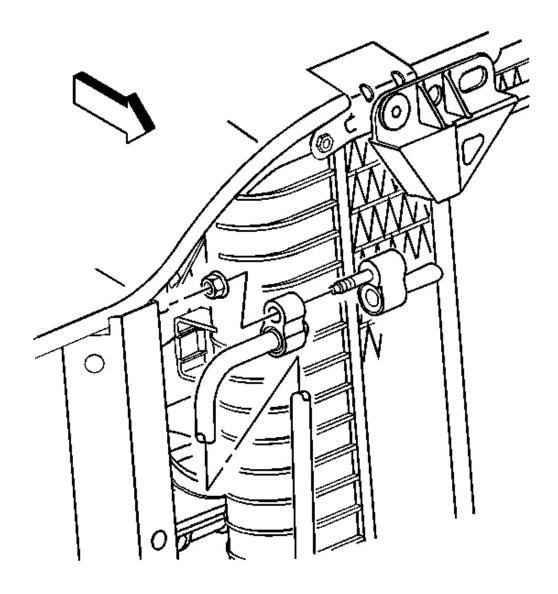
View Of Discharge Hose At Condenser Courtesy of GENERAL MOTORS CORP.
